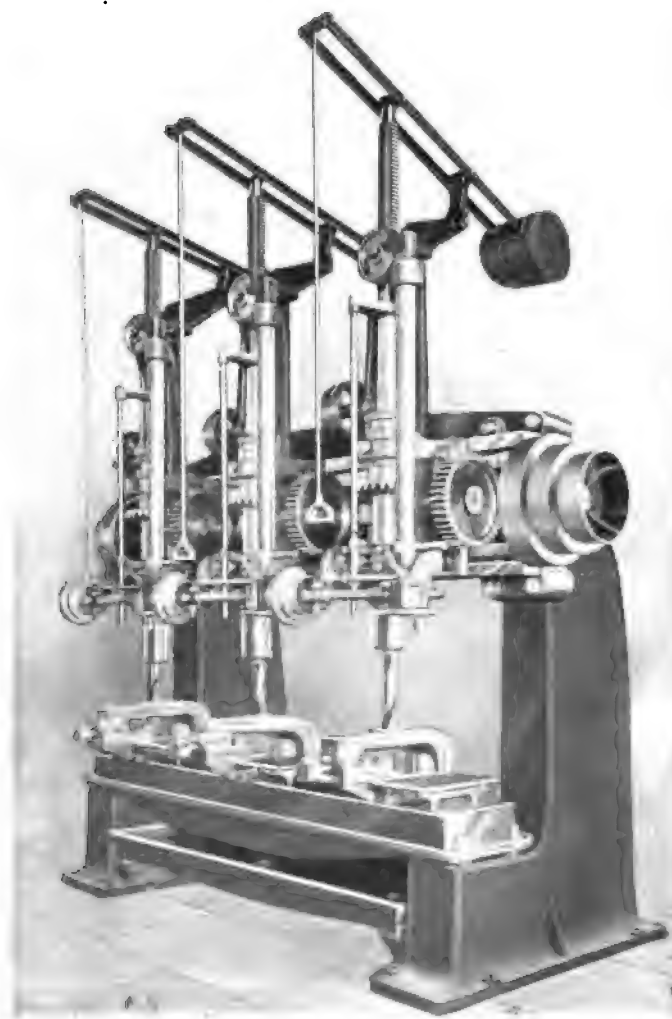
THREE-SPINDLE DRILLING MACHINE.
